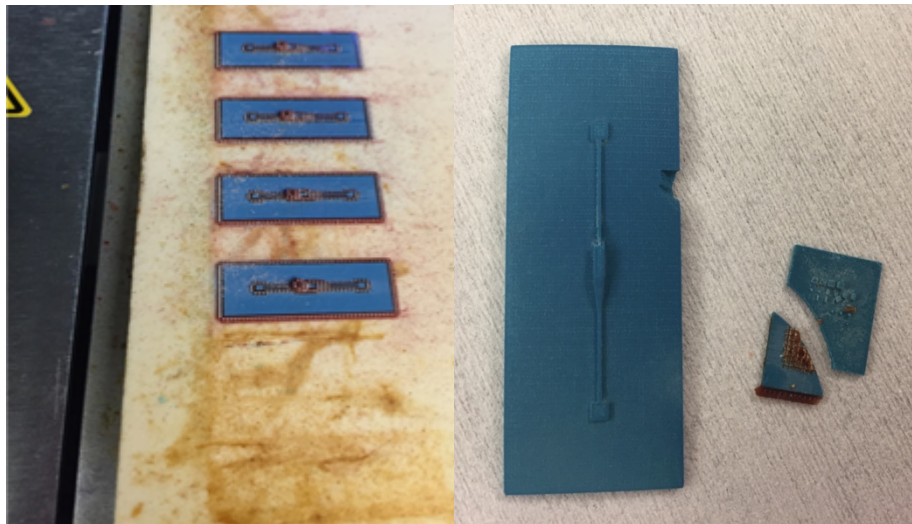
(Left) molds stuck to the build plate before scraping. (Right) Molds that have been chipped or snapped by improper handling
